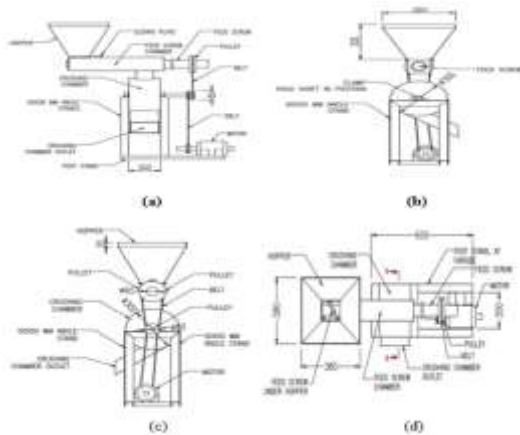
Selected Design (a) Front view, (b) Right view, (c) Left View and (d) Plan
